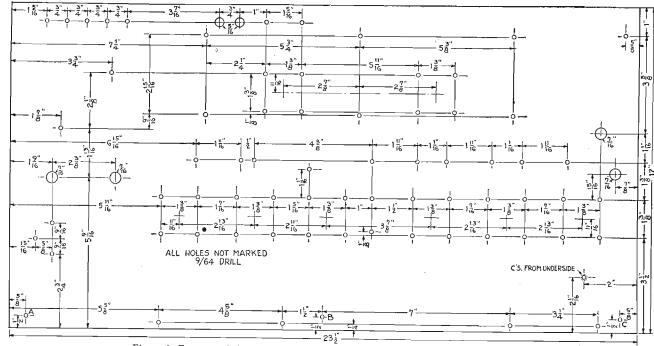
Front panel drilling DRAWING. "Seven holes are all that need be drilled'
